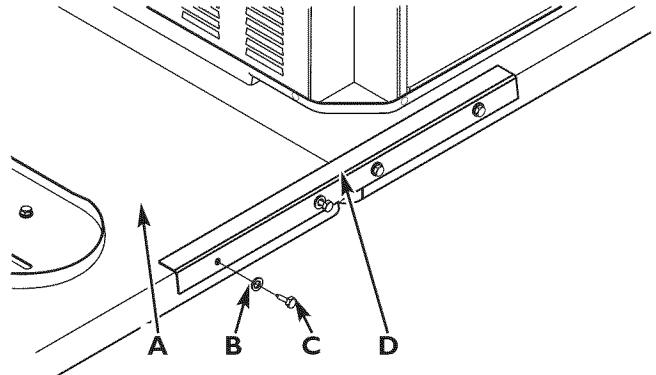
Start Lag Bolts into Mounting Pad Holes
